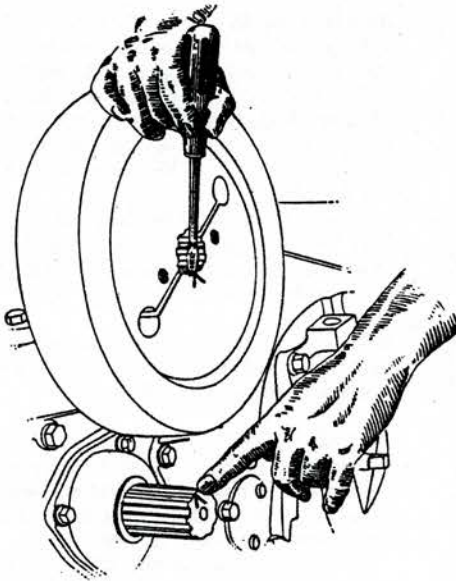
"V" marks on flywheel and crankshaft should mesh. Series H
